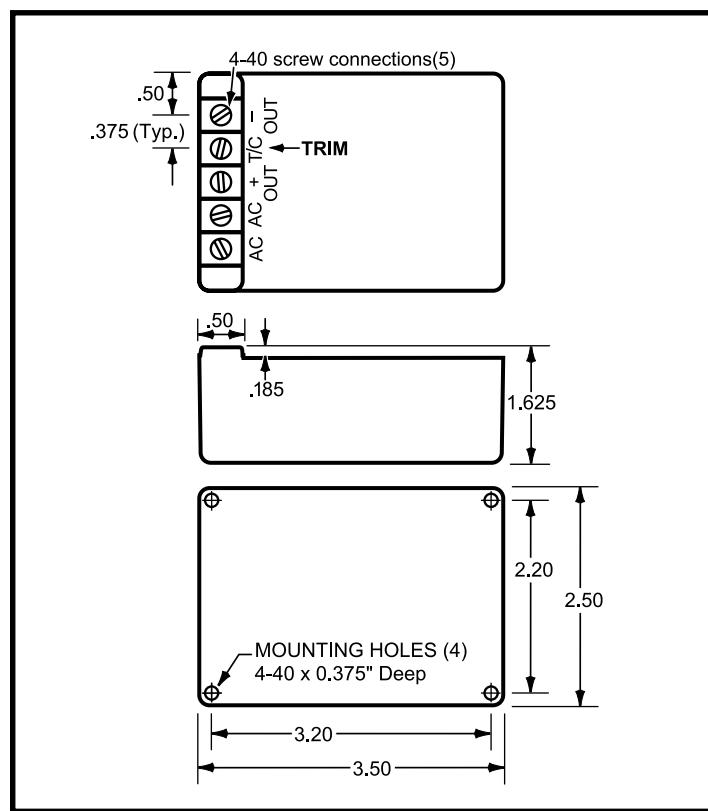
SCMXPRT-001/E-001 Physical Dimensions
